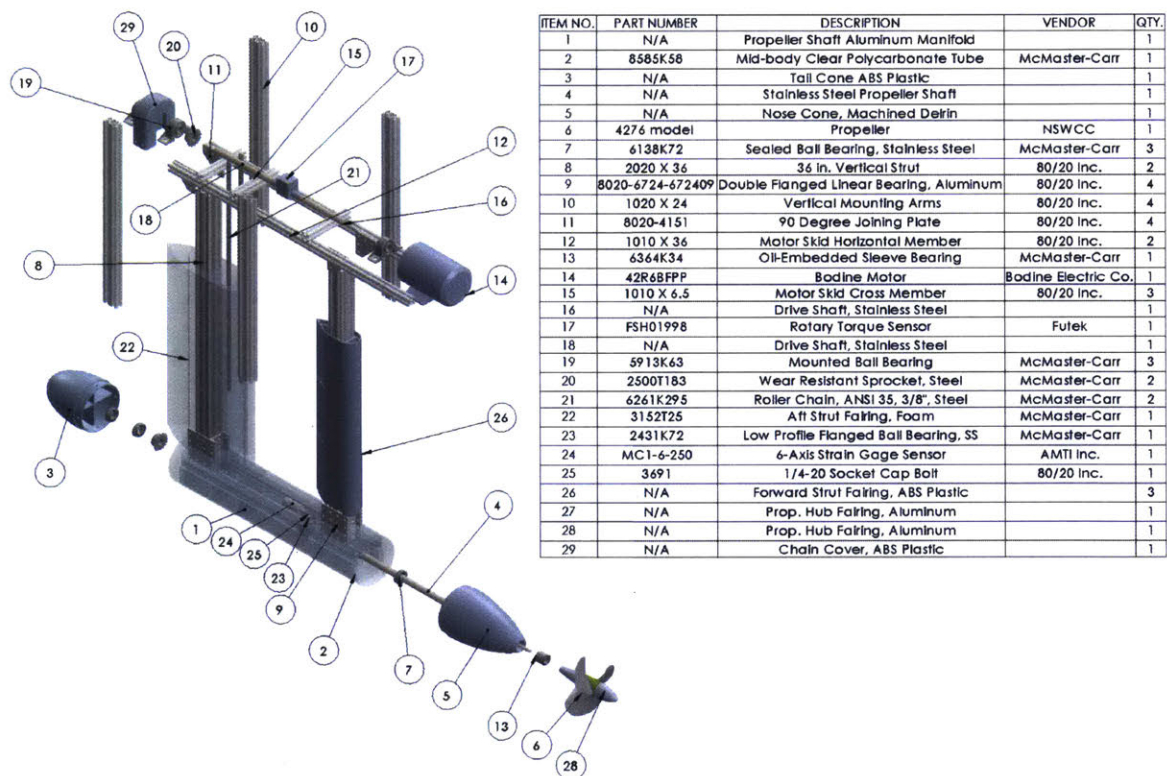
Final Propeller Boat Assembly and Bill of Materials
